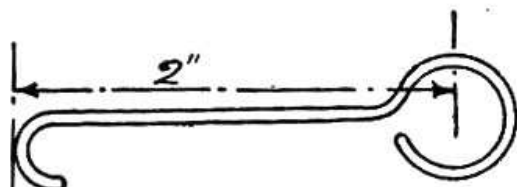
The main propeller shaft. Make the centre part dead straight, or your propeller will vibrate and make the model fly erratically.
